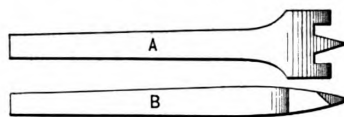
Side and Edge Views of Prong Center or Chuck.
